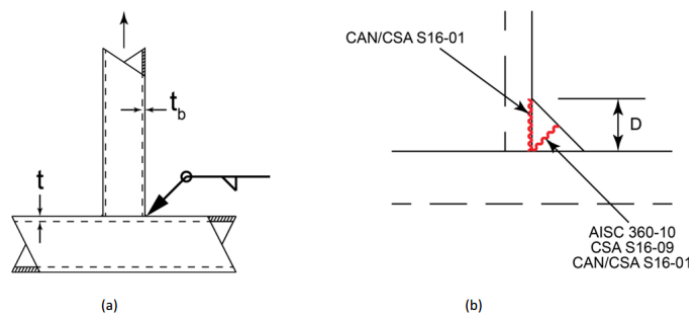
90° HSS T-connection under axial tension (a) and detail of the fillet weld showing assumed failure planes (b) (Parker *et al*, 2013)
